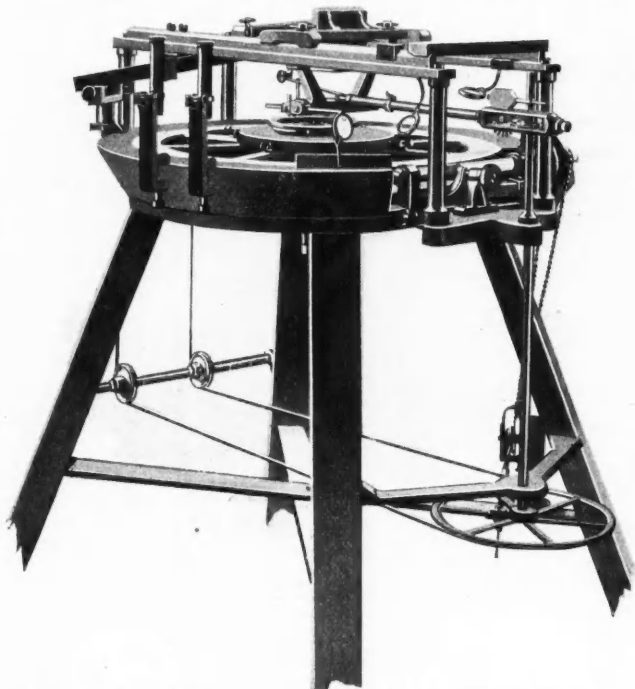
No. 2 GRADUATING ENGINE, BUILT BY GEO. L. BUFF.
